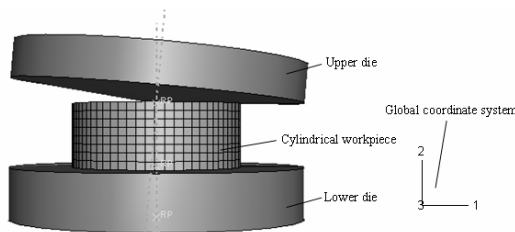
3D FE model of cold rotary forging of the cylindrical workpiece.
